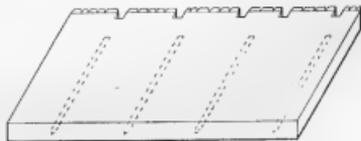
Monoline; finished type-slug. Slightly enlarged.
